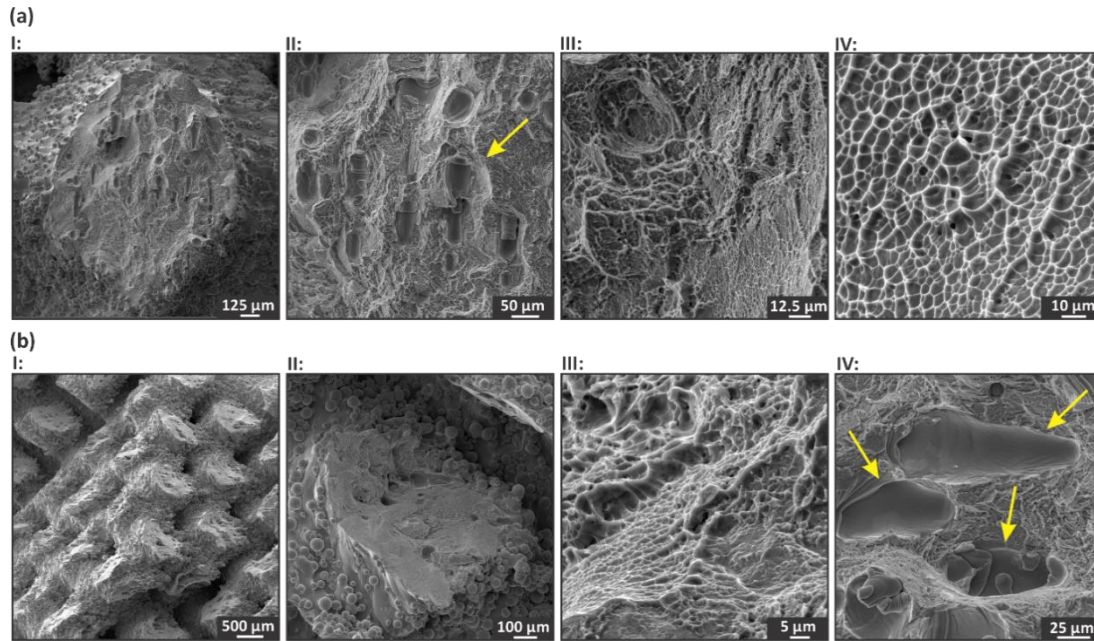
Scanning electron microscopy (SEM) images of the fracture surfaces for (a) P0.25-0.75 and (b) D0.25-0.75 samples. The fracture surfaces are characterized by keyhole void defects ((b)IV)) and ductile deformations ((a)IV)).
